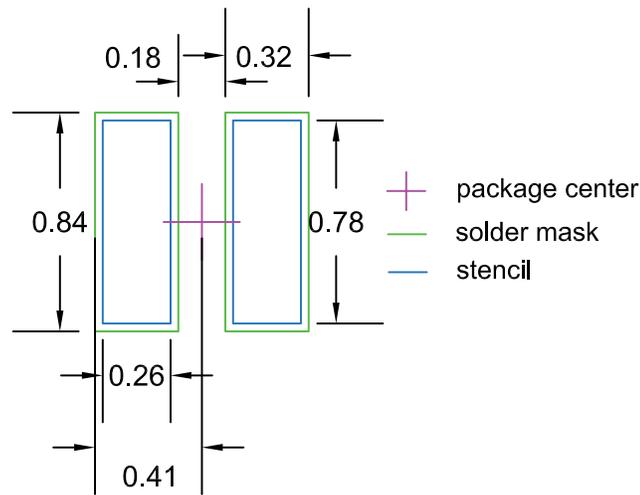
Recommended bottom pad drawing of LUXEON HL1Z. All dimensions in mm.
